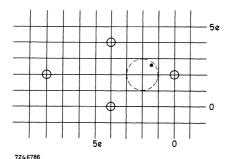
Hole pattern for mounting on a printedwiring board; e = 2,54 mm.
